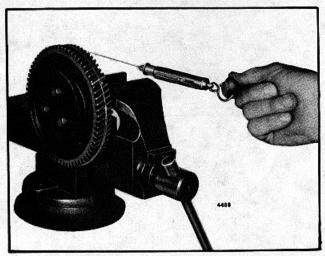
Checking Pre-Load of Idler Gear Bearing
